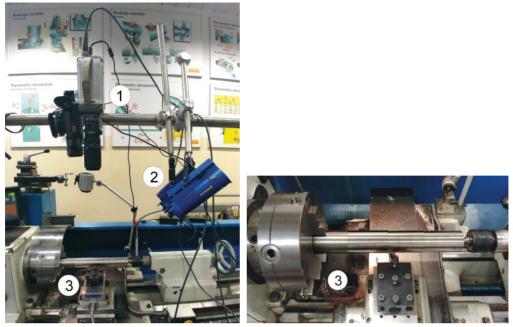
The test stand: 1 – Phantom v5.2 high-speed camera placed in front of the cutting zone, 2 – spot illumination system Dedocool, 3 – tool position in relation to the workpiece
